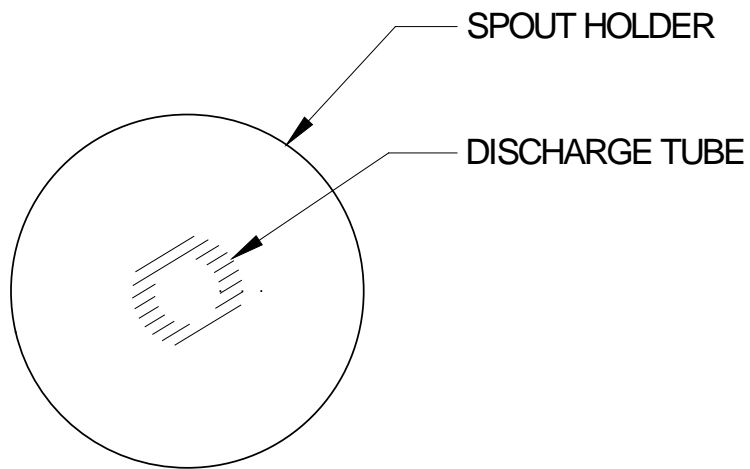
Portable Sampler Bottle Positioning Plate.
